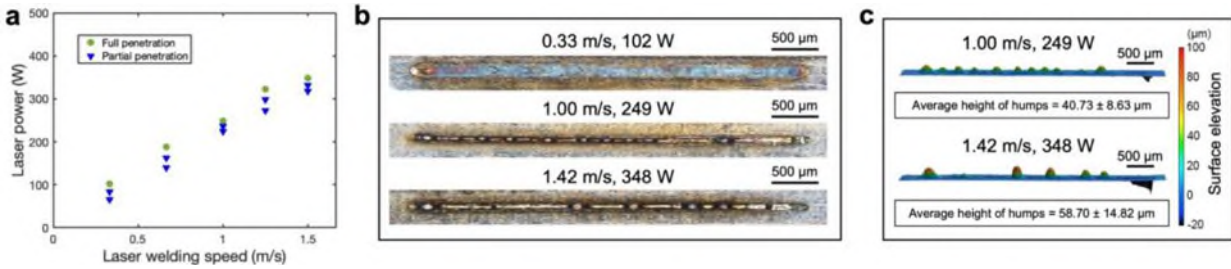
a The corresponding laser power at each welding speed was determined at EWI by incrementally increasing the laser power until full penetration was achieved. b Top surfaces of weld seams at the welding speeds of 0.33, 1.00, and 1.42 m/s. Note that the fastest speed was adopted as 1.42 m/s instead of 1.50 m/s due to the equipment setup at ANL. c Surface topography of weld seams at 1.00 and 1.42 m/s, and the average hump height relative to the weld top surface.
